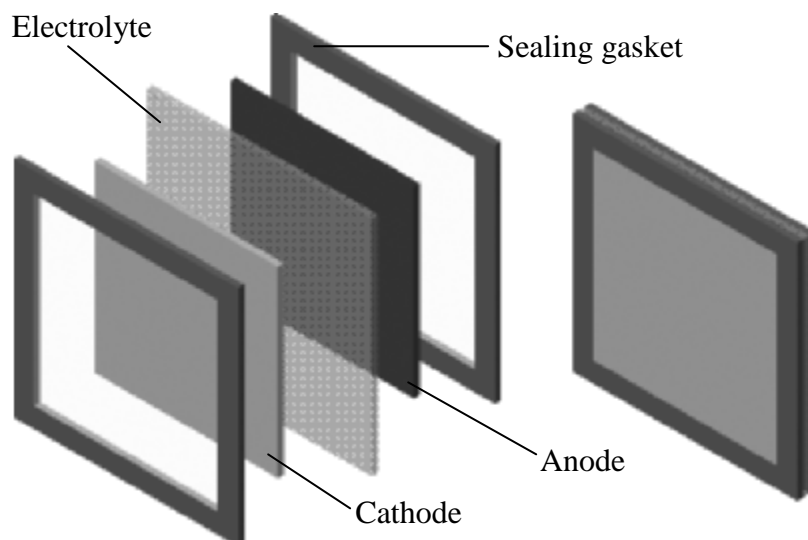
Membrane Electrode Assembly with a gasket sealing the edges. (Larminie and Dicks 2003)
